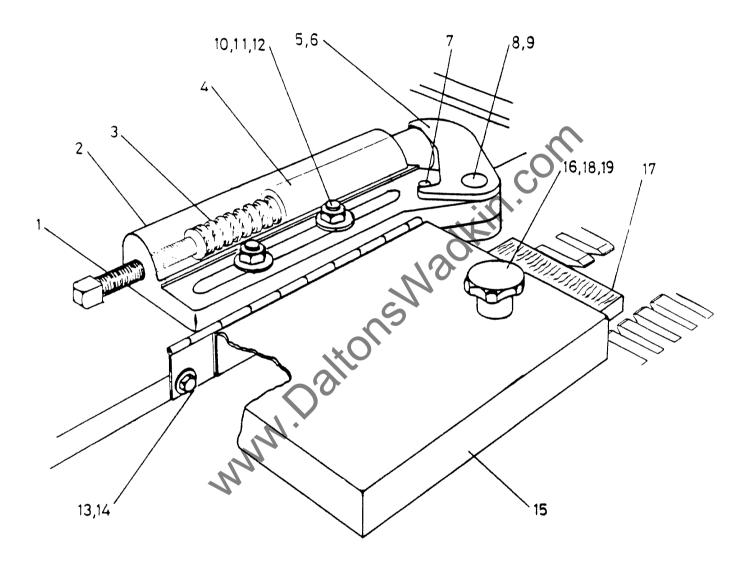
SIDE PRESSURE BEFORE NEARSIDE HEAD AND GUARD OVER FIRST BOTTOM HEAD
